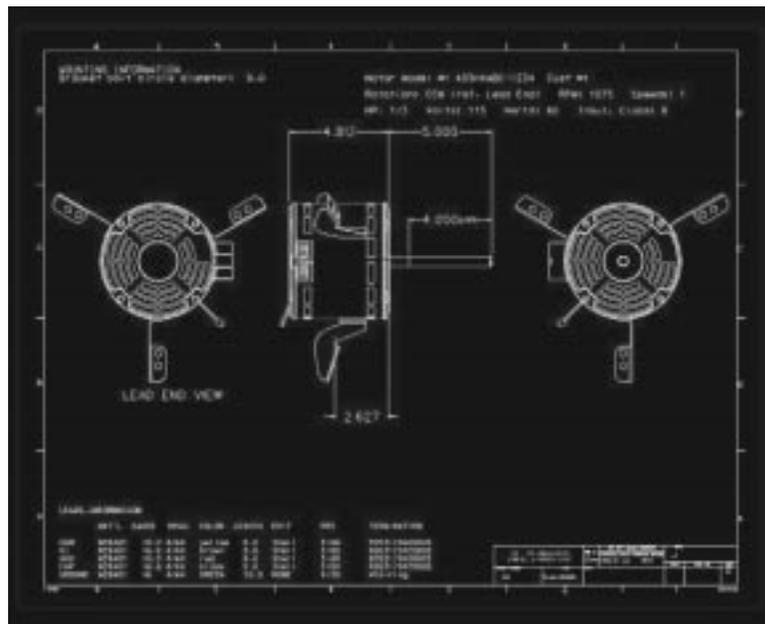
The motor design shown in figure 1 can also be viewed as a fully annotated dimensional drawing for design review.
